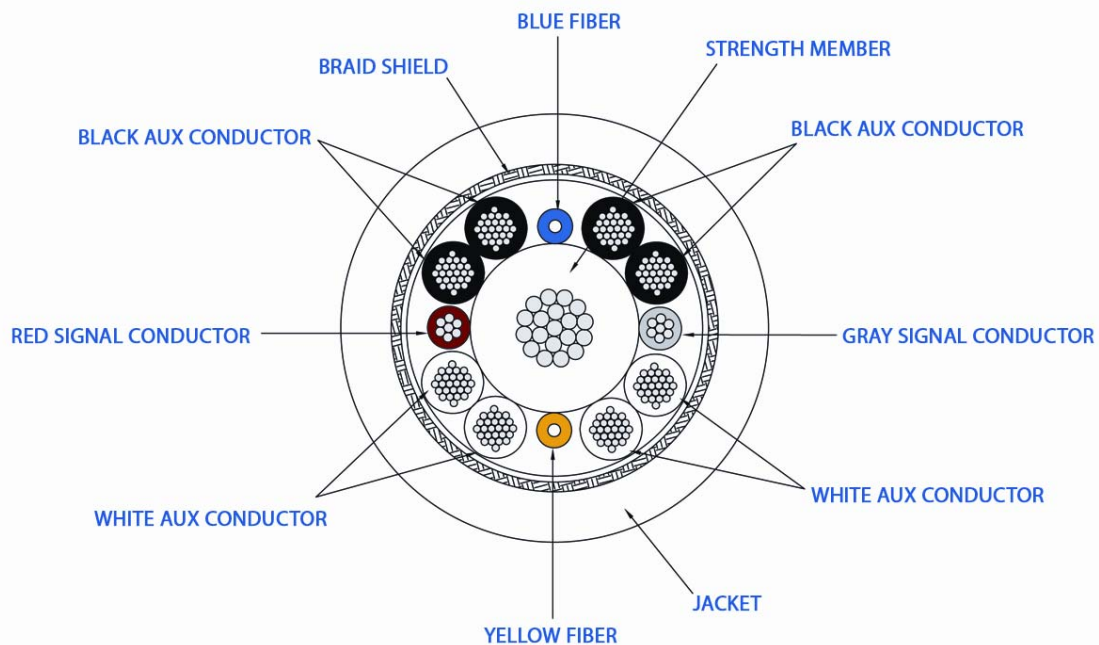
Configuration for 8 auxiliary conductor cable types (Plug end)
